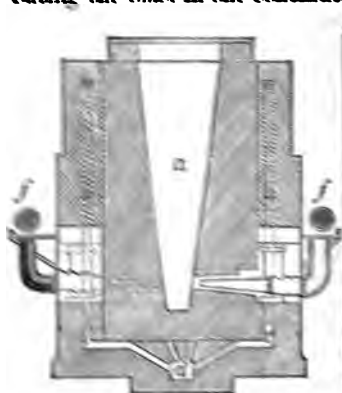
VERTICAL SECTION OF RACHETTE FURNACE.
